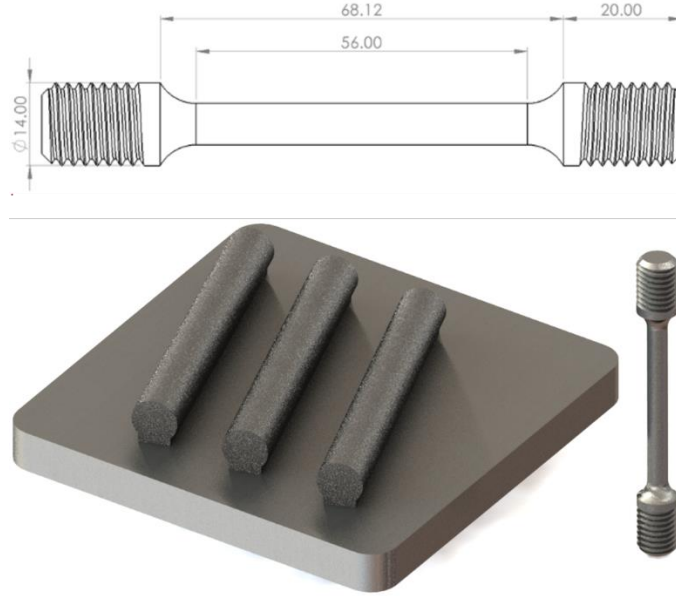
Schematic diagram of the PBF-LB samples on a build plate and the mechanical test specimens.
